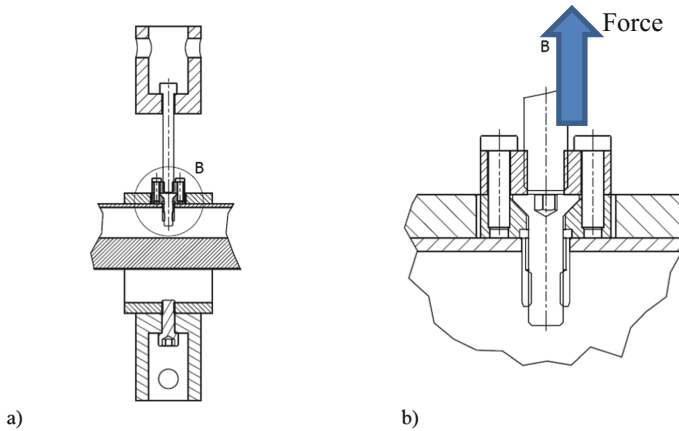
Test stand for pull-out test: a) general view, b) detail of application of the tension force to the bolt head
